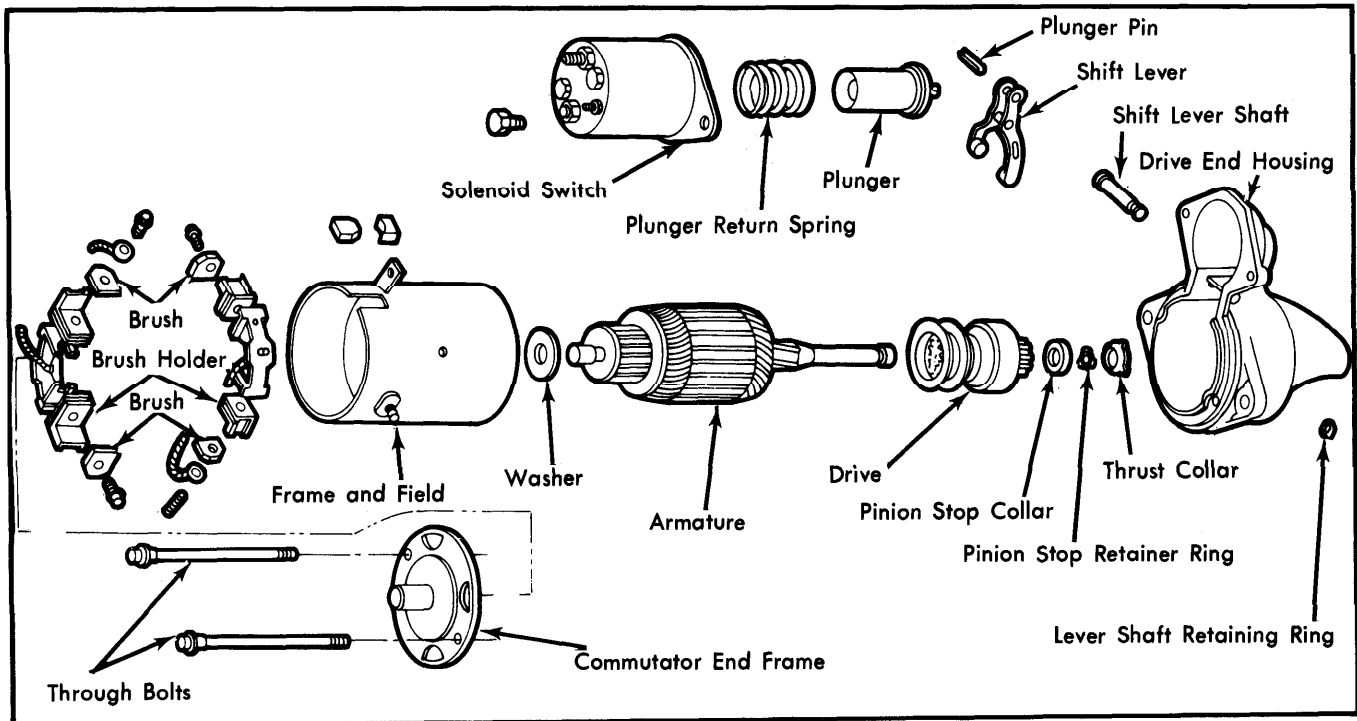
Exploded View of Delco-Remy SMT Starter Motor Assembly (10MT Similar)
